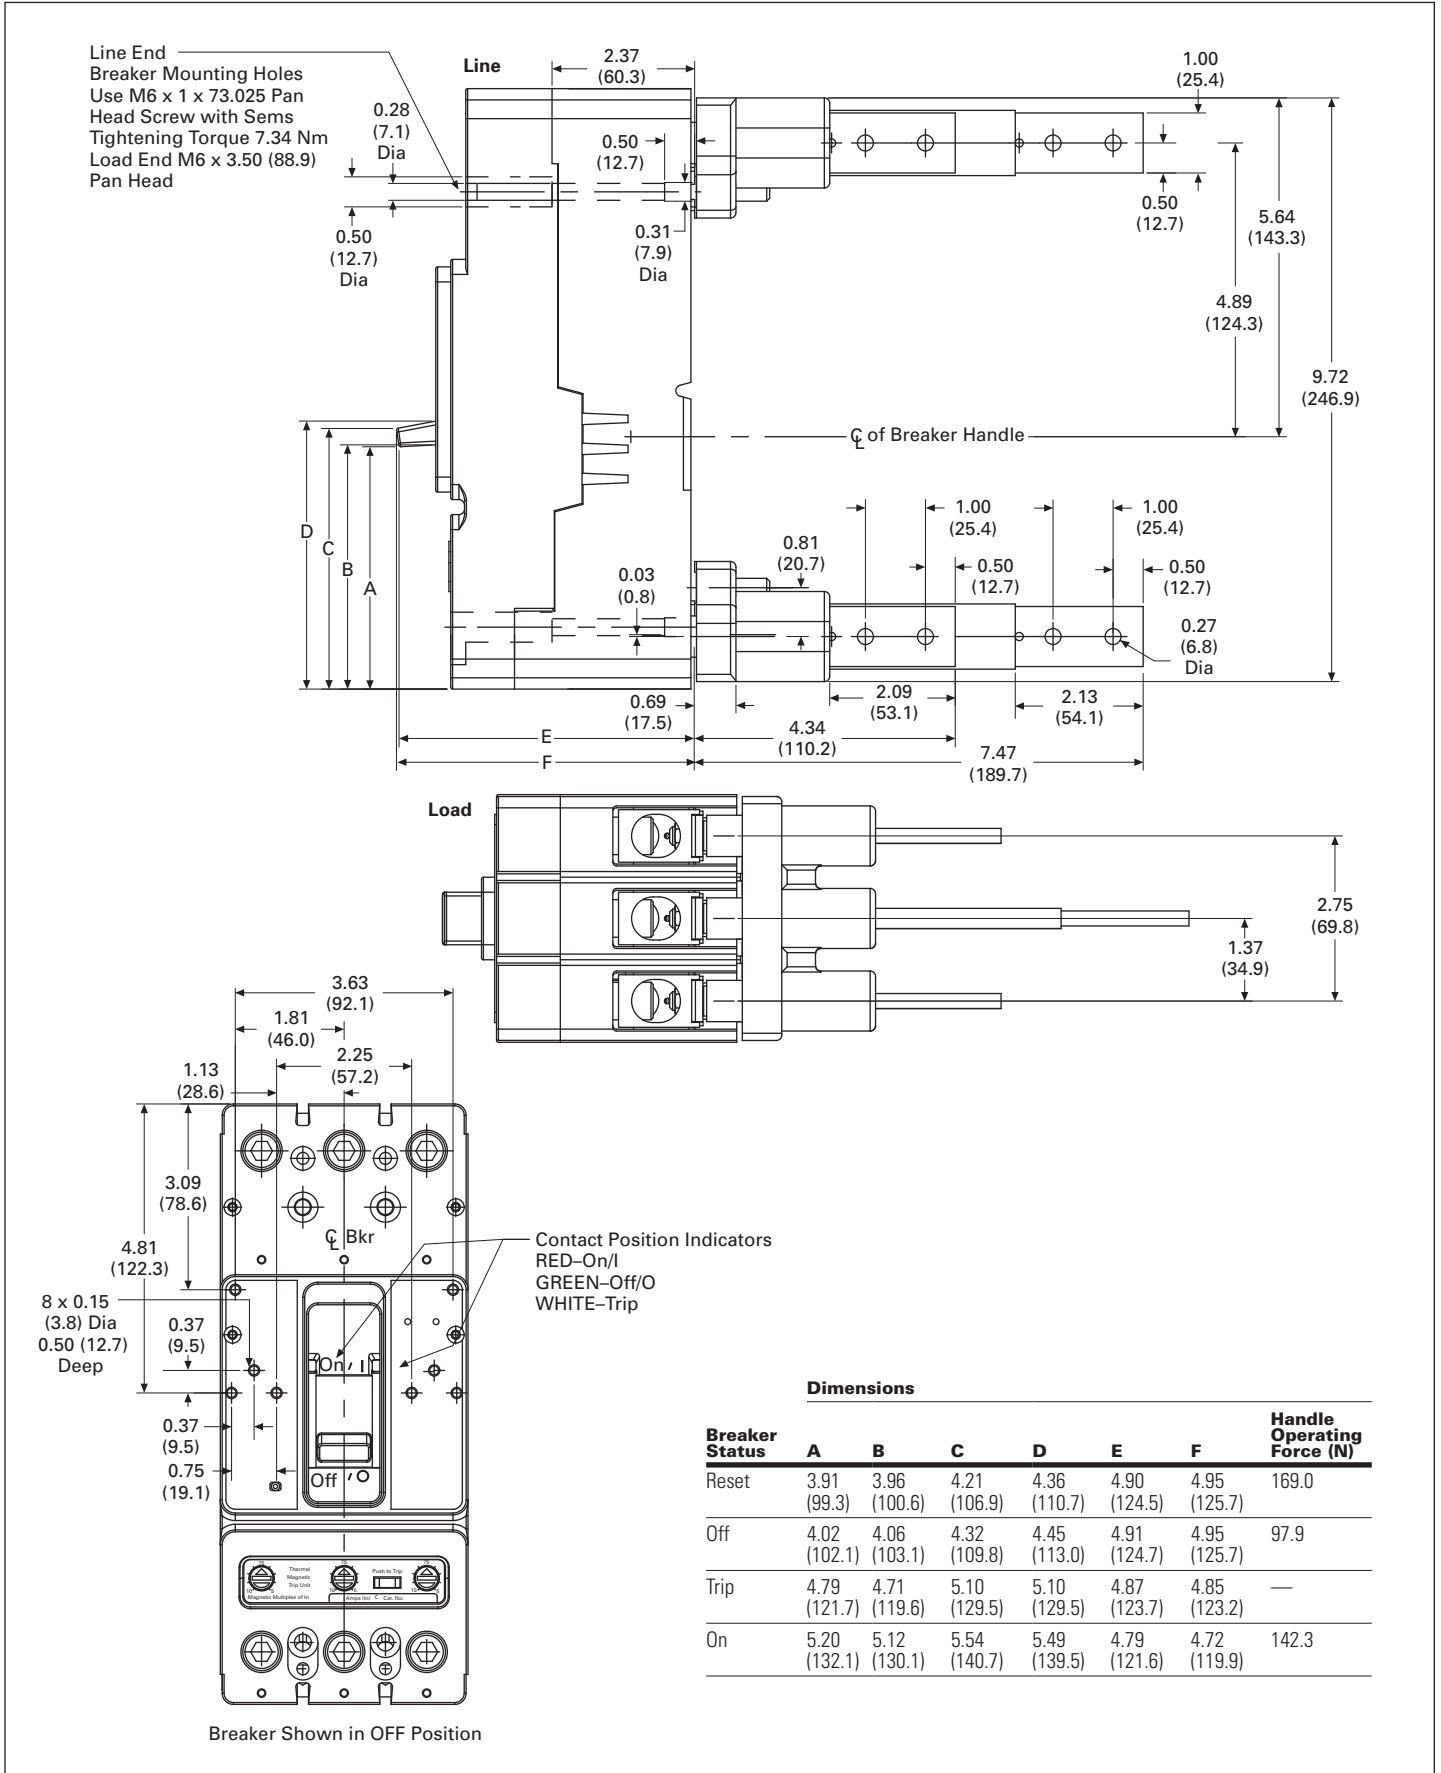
Type JG 175–250A Three-Pole—Dimensions in Inches (mm)
